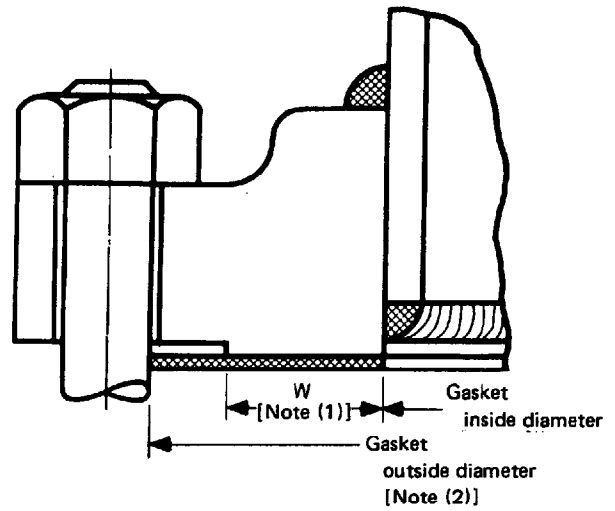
³ SLIP-ON RAISED FACE WIDTH GASKET WITH EDGES EXTENDING TO THE BOLT
